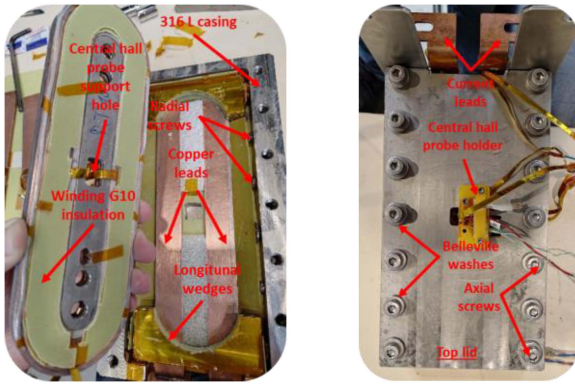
DRT10-11 during assembly (left) and closed structure before mounting on probe (right).
